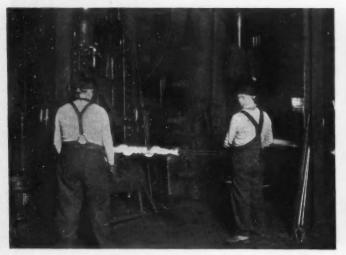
FORGING A CHEVROLET CRANKSHAFT
